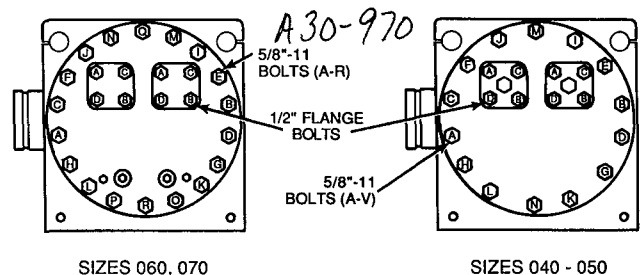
Cooler Head Bolt Tightening Sequence (Typical Tube Sheet)
